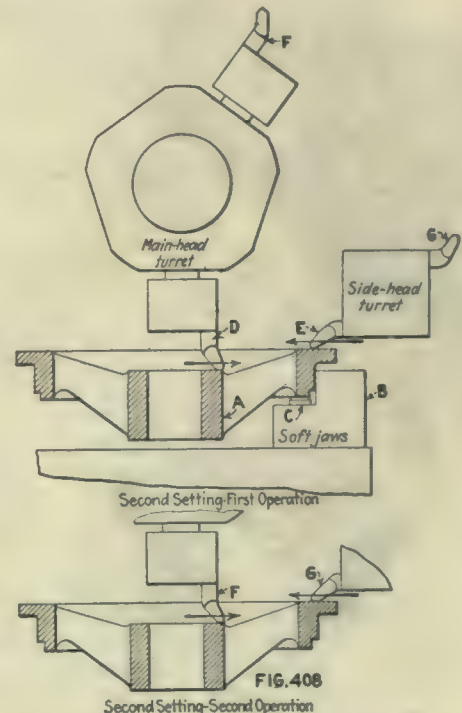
SECOND SETTING LAYOUT WITH STANDARD TOOLS
